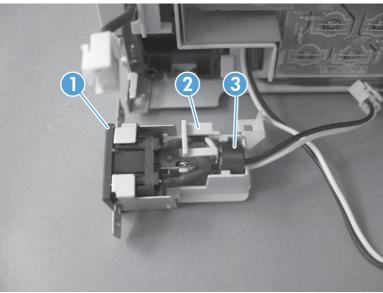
Remove the low-voltage power supply assembly (9 of 9)
